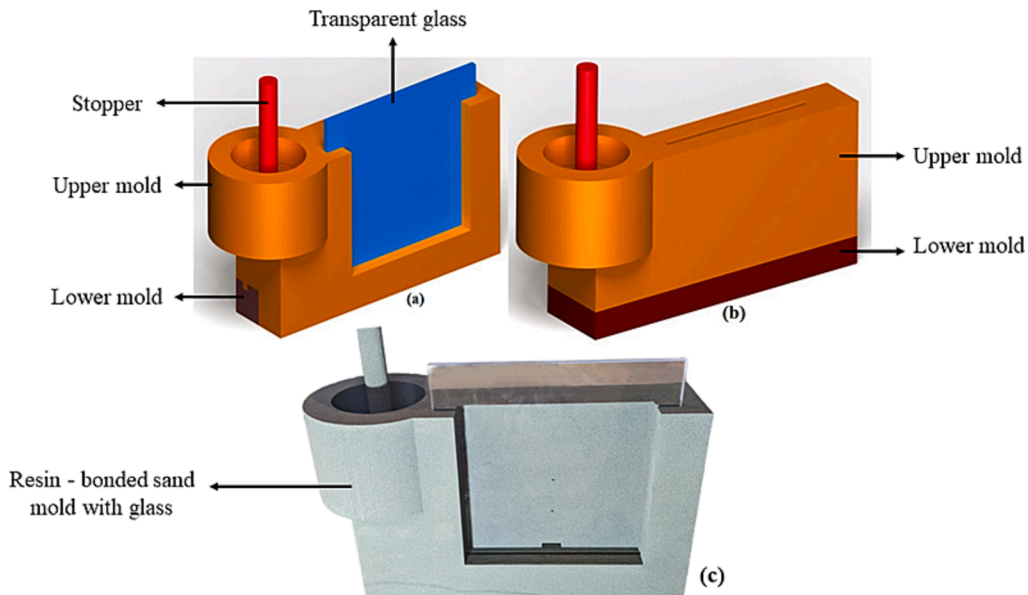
Geometry of mold a) Designing mold with glass by CATIA b) Designing mold without glass by CATIA c) 3D printing resin - bonded sand mold with glass.
